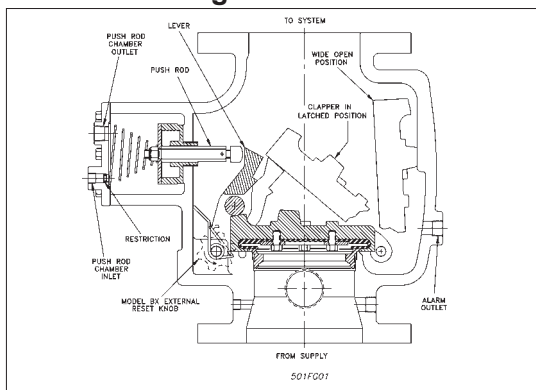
Clapper In Closed - Latched Open - Wide Open Position
